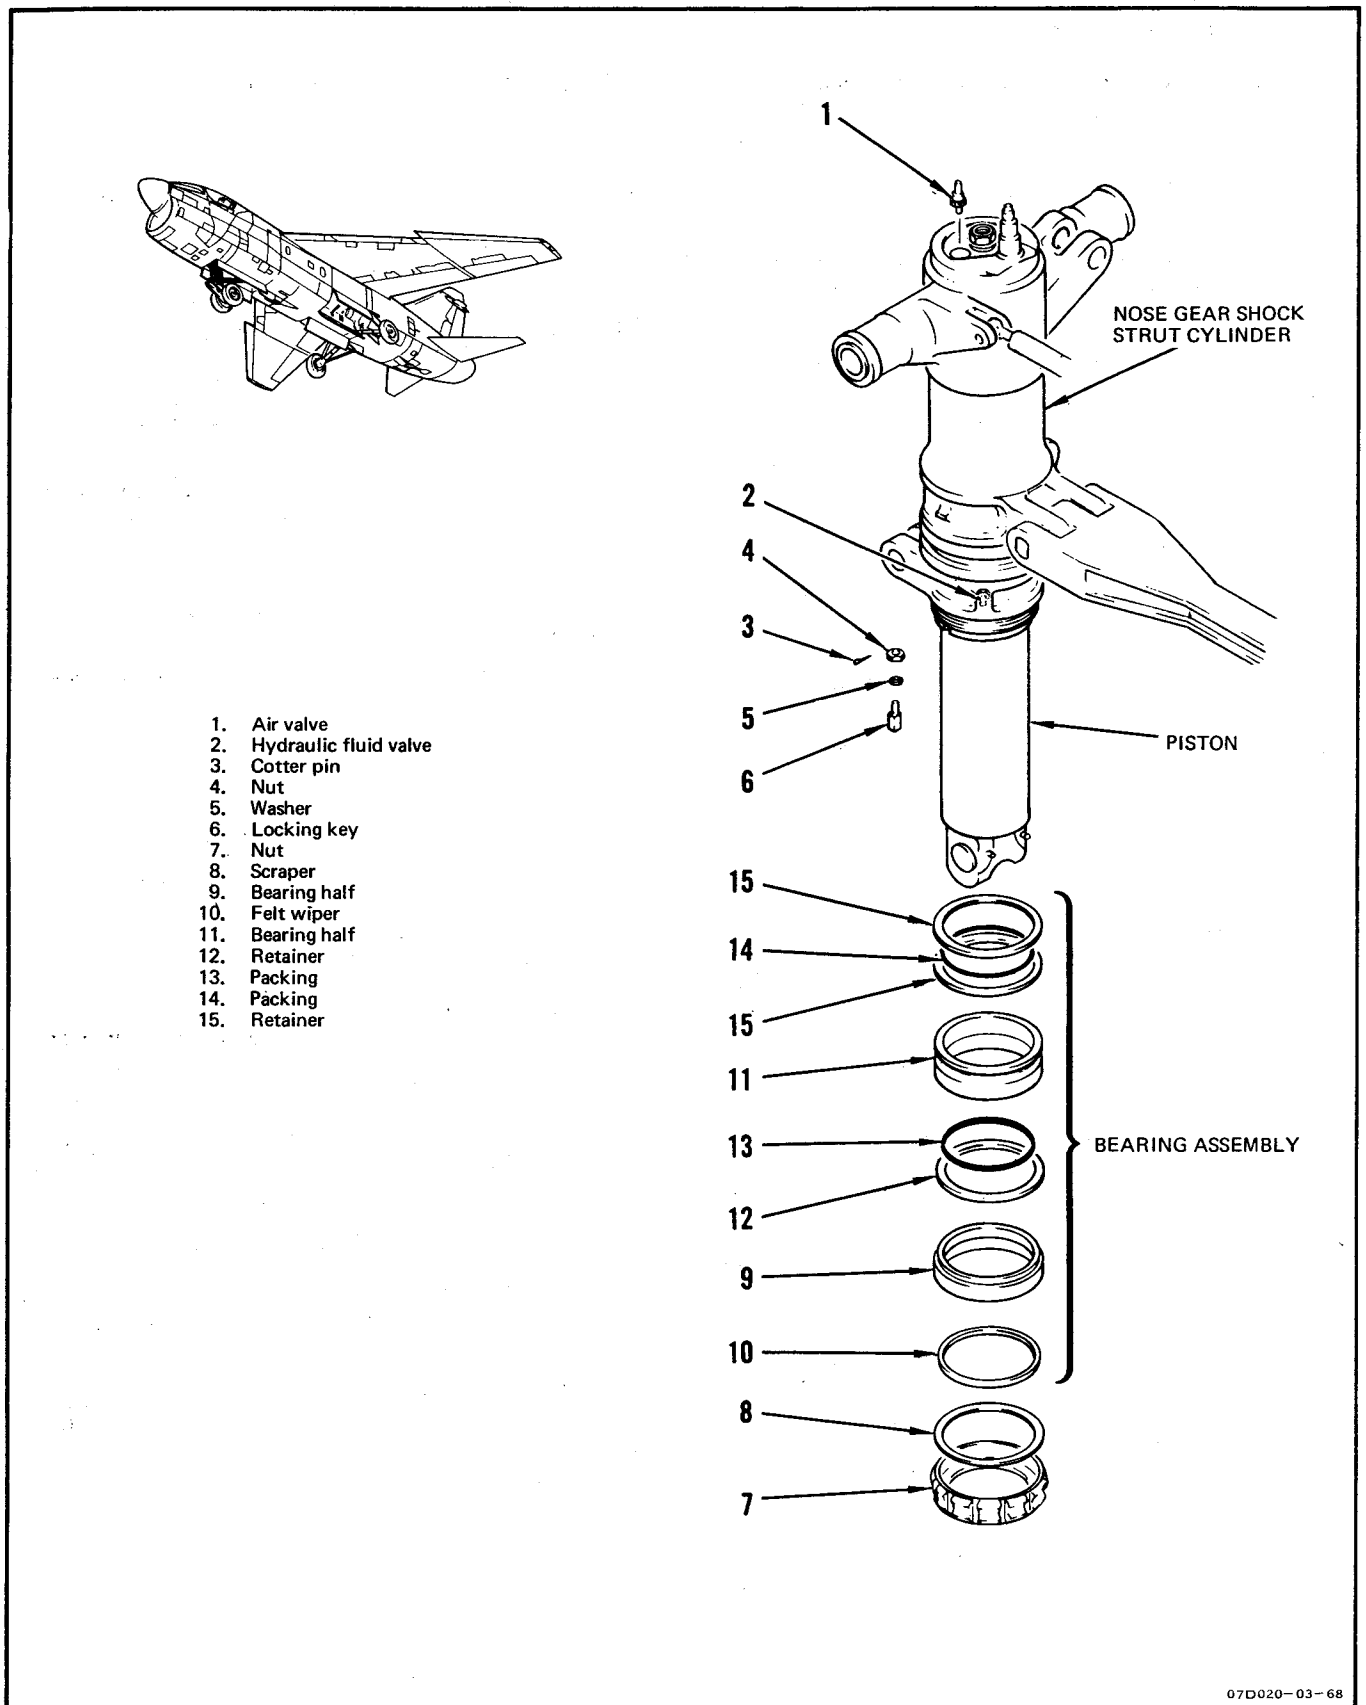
Nose Gear Shock Strut Seal Replacement
